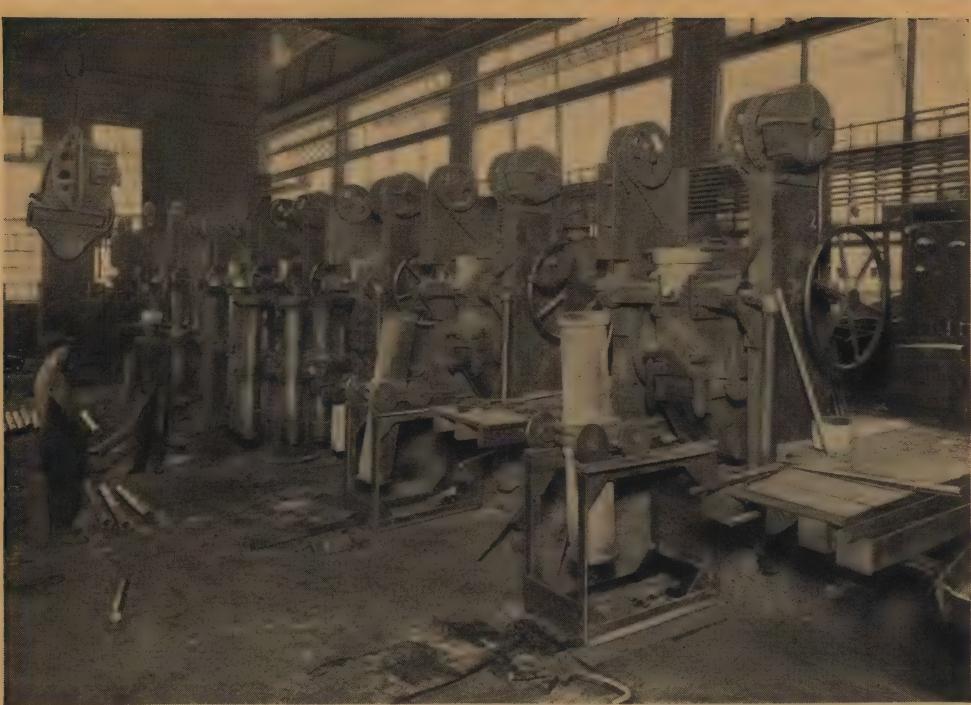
The pouring aisle of a battery of Bridgeport brass furnaces. These furnaces are used for pouring billets that go to the tube mills and the extrusion machine.
